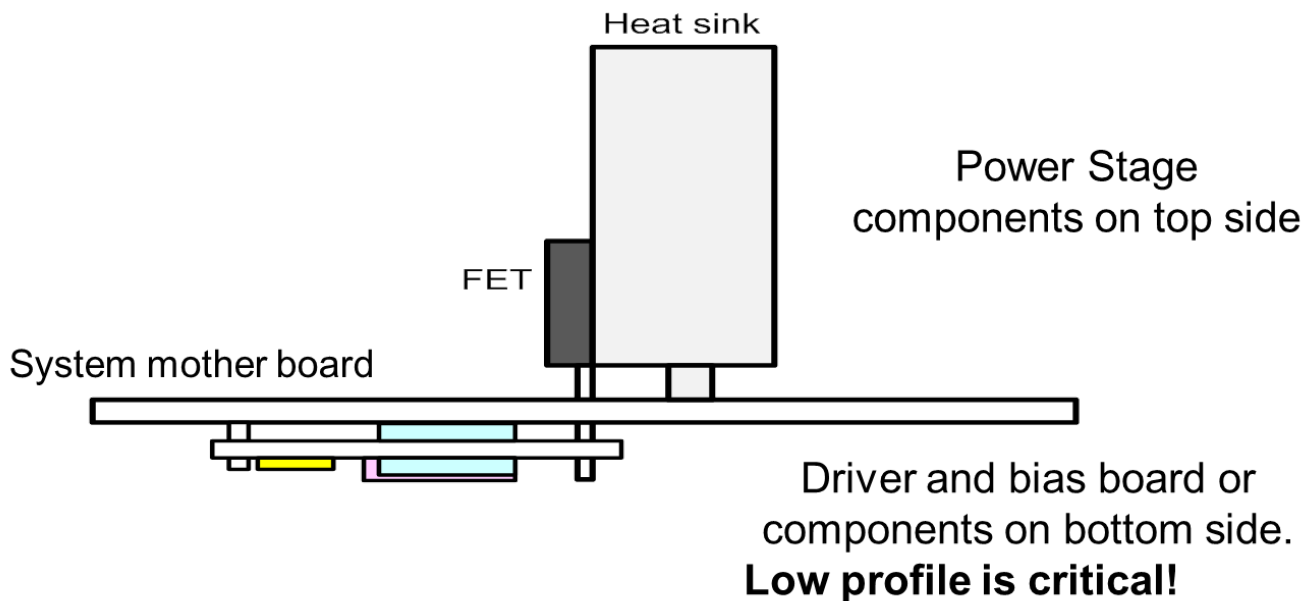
Soldering UCC5390SCDEVM-010 Board for System Level Evaluation
